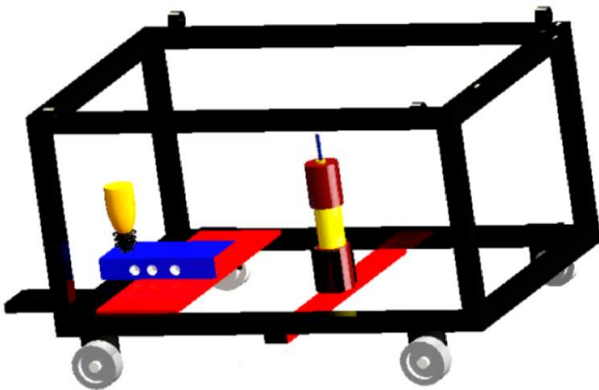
CAD model of multi-axis dumper – Chassis and mounts
